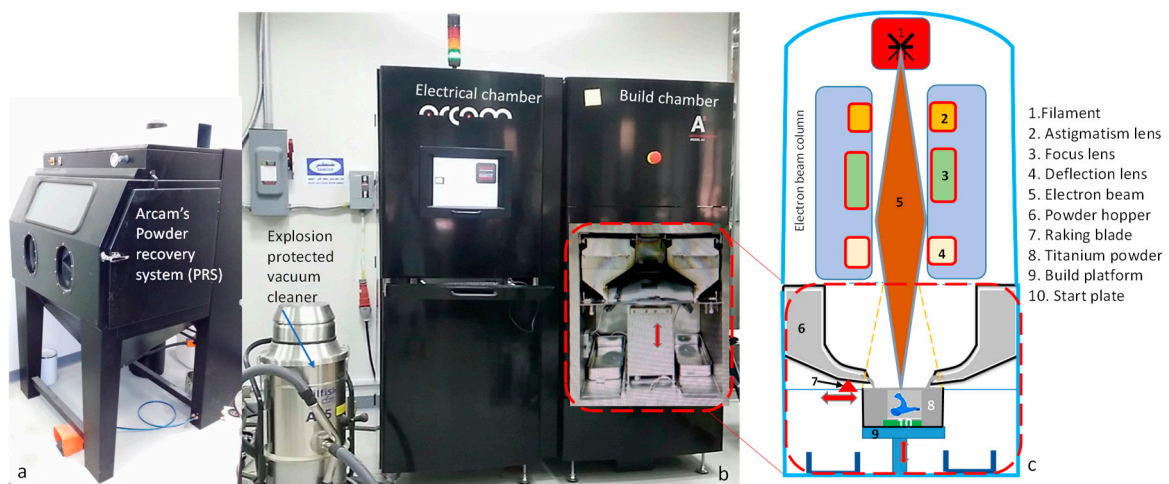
(a) ARCAM powder recovery system unit to remove the sintered powder attached to the build part, (b) ARCAM A2 electron beam melting machine, and (c) the schematic working diagram of electron beam melting machine.
